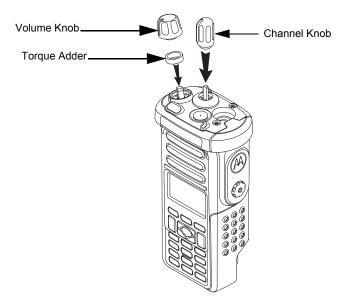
Reassemble the Volume Knob and Channel Knob
